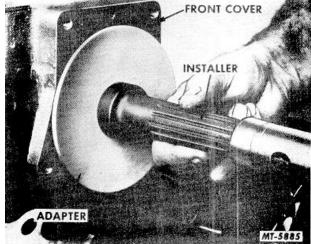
Installing Injection Pump Drive Shaft Rear Bearing
